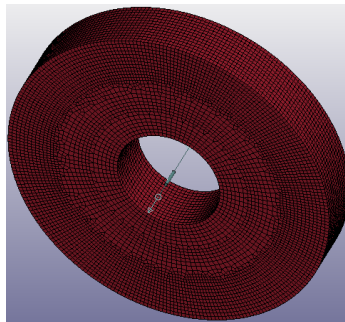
18: JOINT-REVOLUTE between a shaft and rotating fly-wheel
